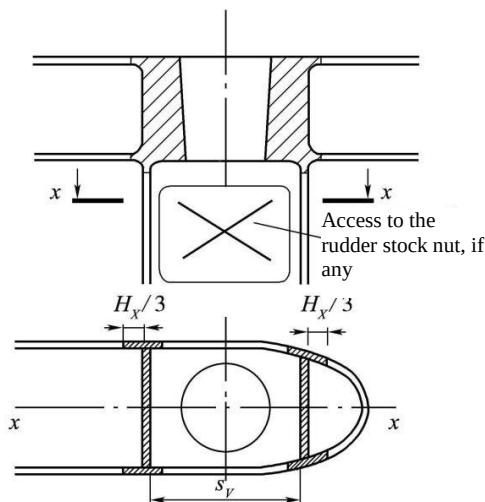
Cross-section of the connection between rudder blade structure and rudder stock housing
